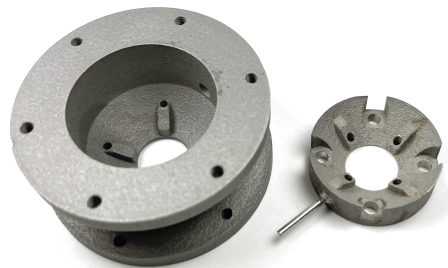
Additively manufactured 20 mm spacer (left) and ring element (right) with wire for electrical contact.
